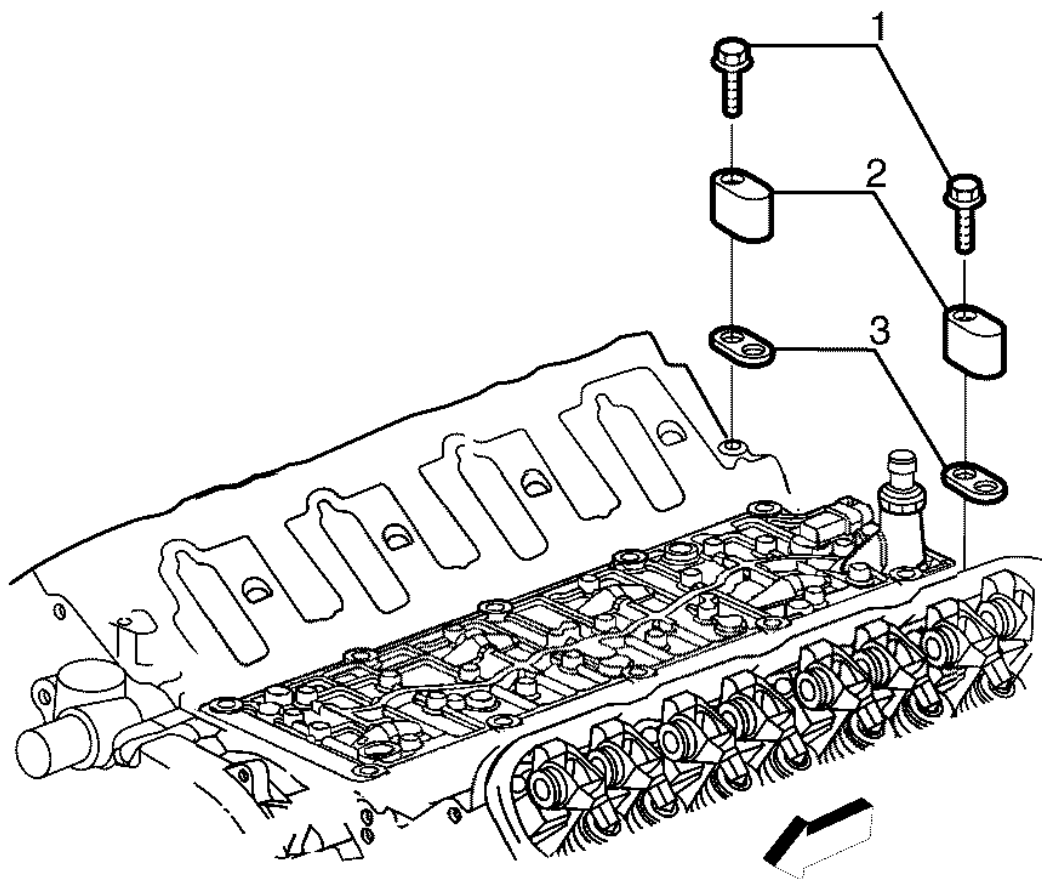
Identifying Engine Coolant Air Bleed Cover To Cylinder Head Retaining Bolts
